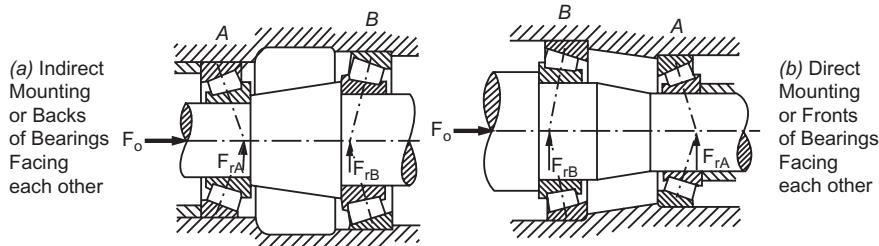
Two taper roller bearings mounted on a single shaft.
